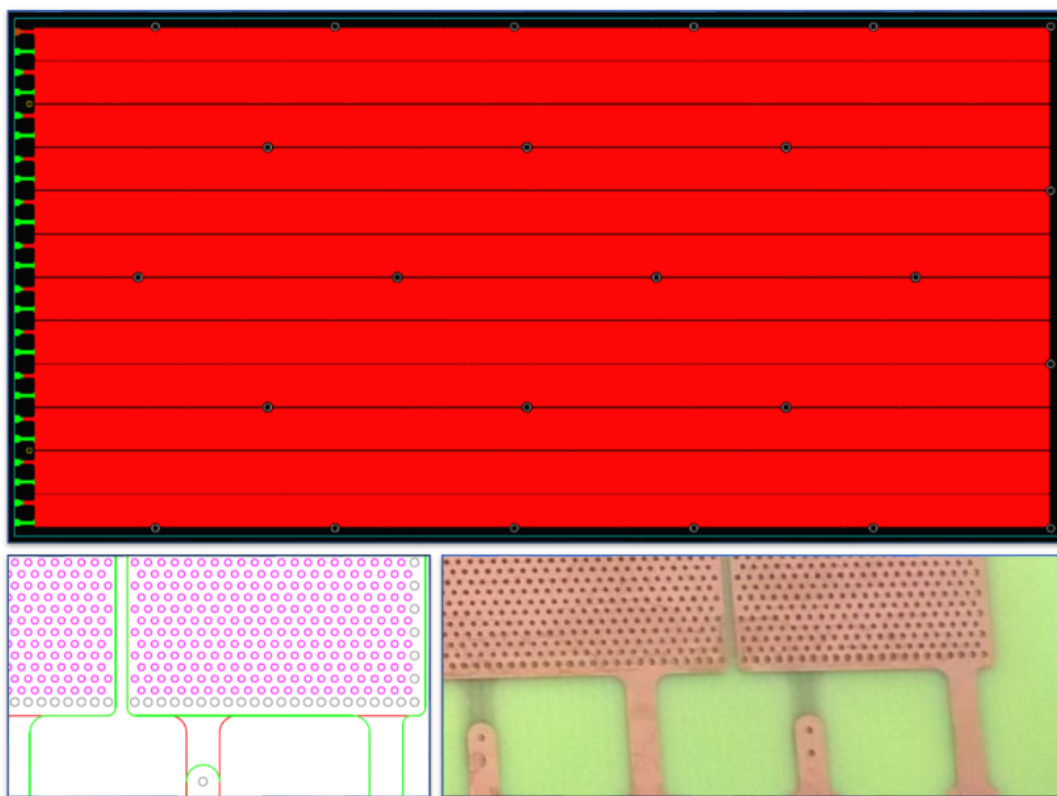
Top: Cad drawing of a $287 \times 581\ \text{mm}^2$ THGEMs with 12 sectors; Bottom left: Zoom of a corner of the CAD drawing showing the holes with $500\ \mu\text{m}$ diameter; Bottom right: Picture of the corner for a real THGEM
